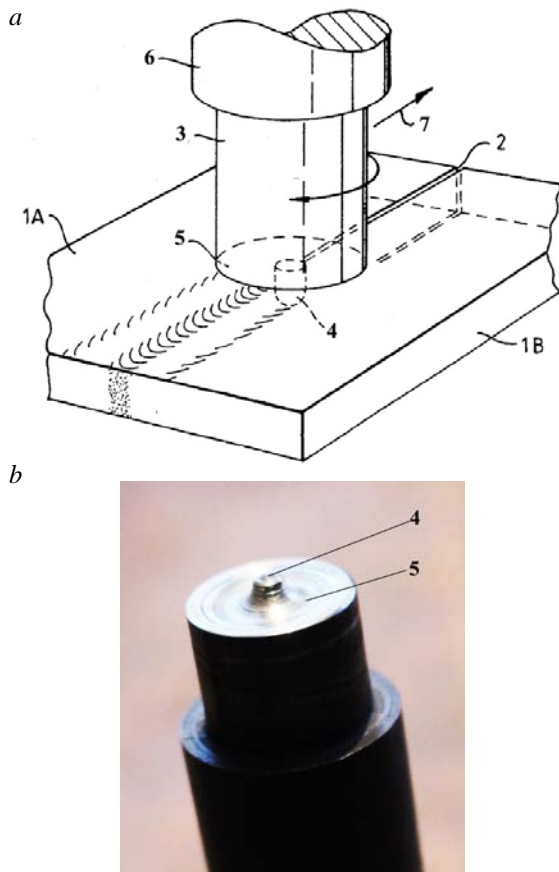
FSW process of two workpieces (*a*) and working tool (*b*):
